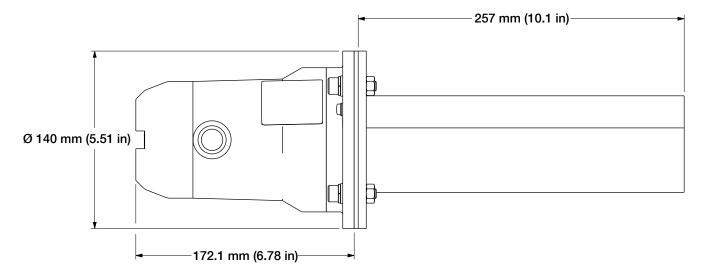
5. Dimensions of Standard LM80 with P801 Dust Tube Option and A800 mounting bracket
